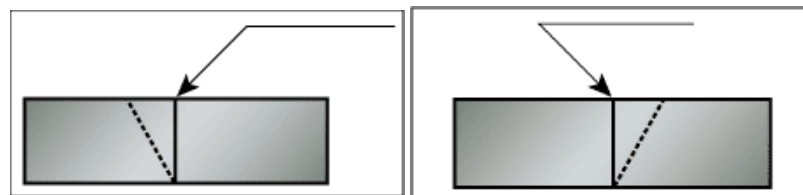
Arrow line and arrow head used in welding drawings. (The welding institute n.d.)
